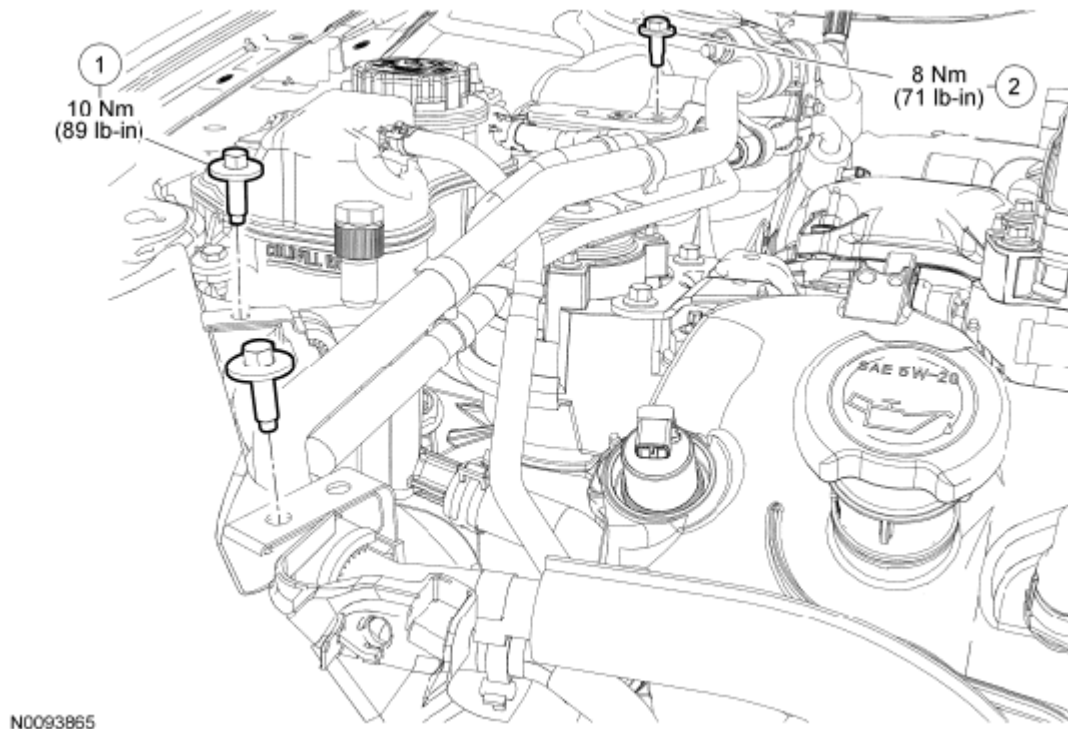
Identifying Valve Cover Components With Torque Specifications RH (1 Of 3)
